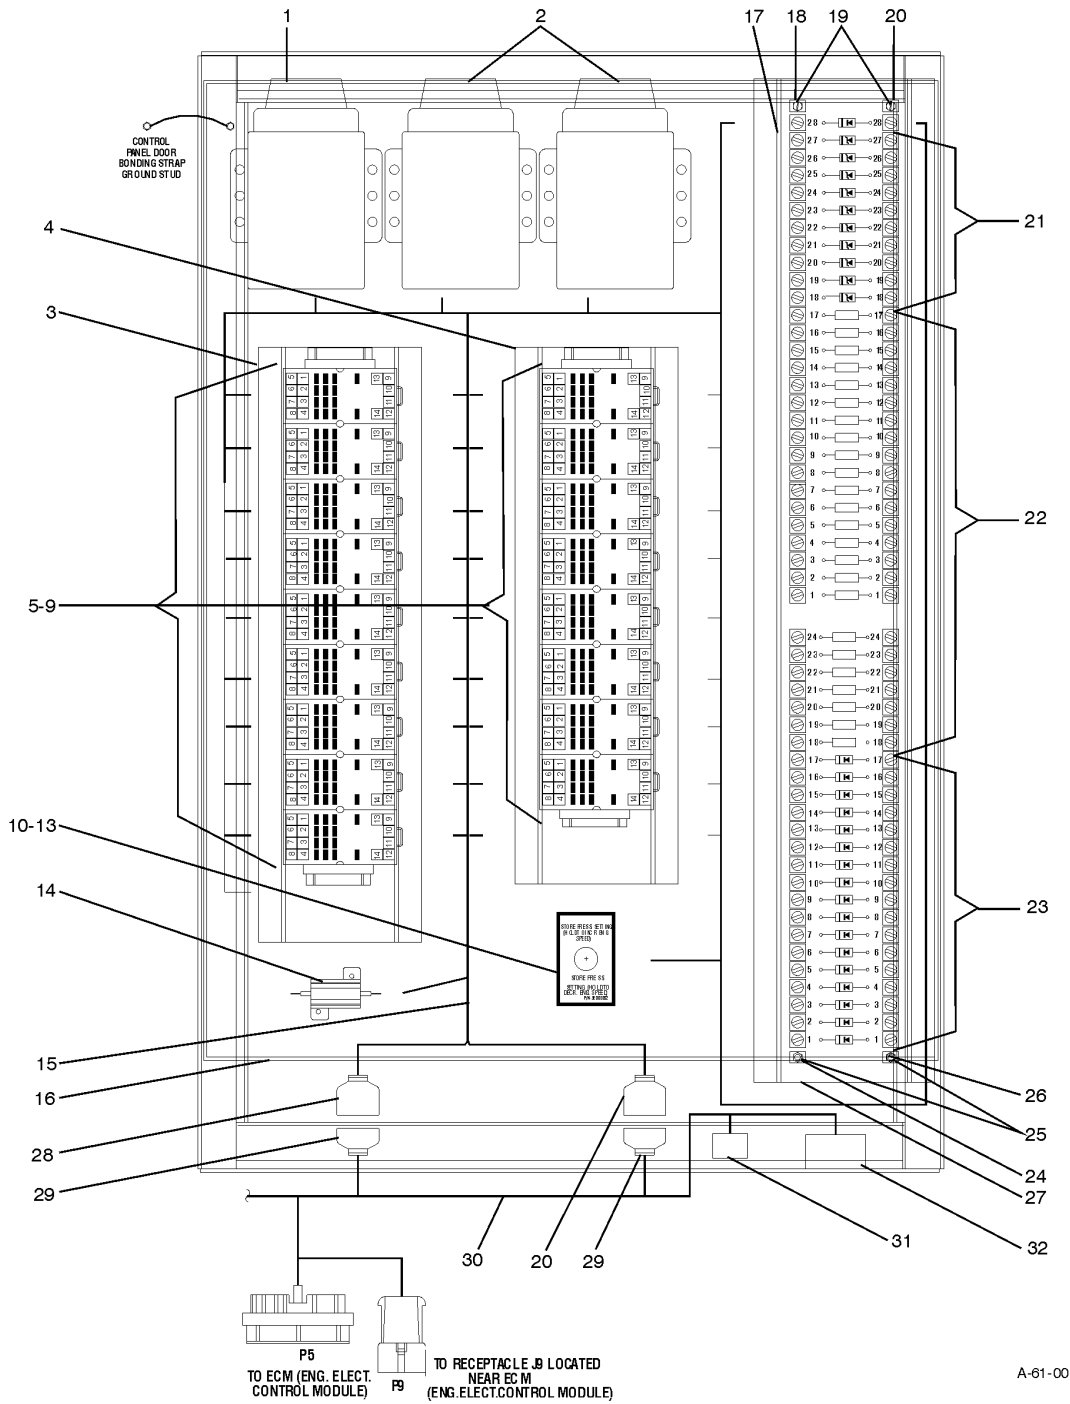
Control Panel, Assembly (Sheet 2 of 2)
